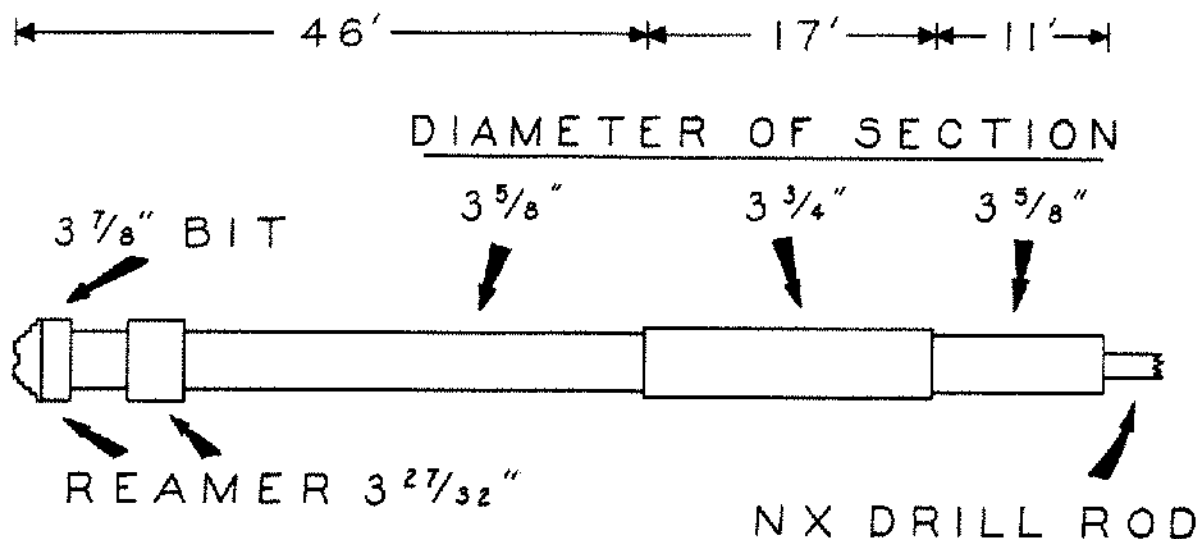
TYPICAL ASSEMBLY OF CORE BARREL FOR CONTROLLED DRILLING
